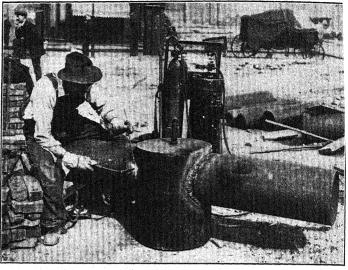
Welding with oxy-acetylene blowpipe. A completed weld shown at the right.
